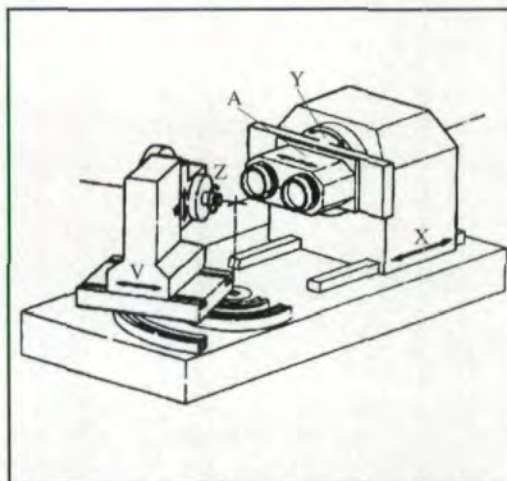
CNC bevel gear grinding machine, Klingelnberg WNC 80.
